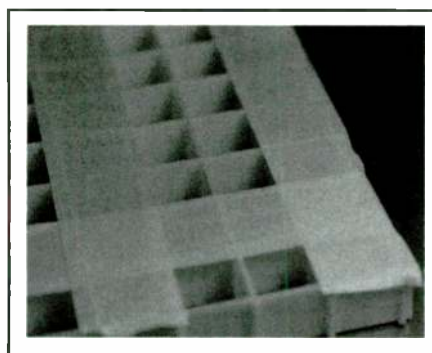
Inside of stator support showing detail of epoxy-filled square.
